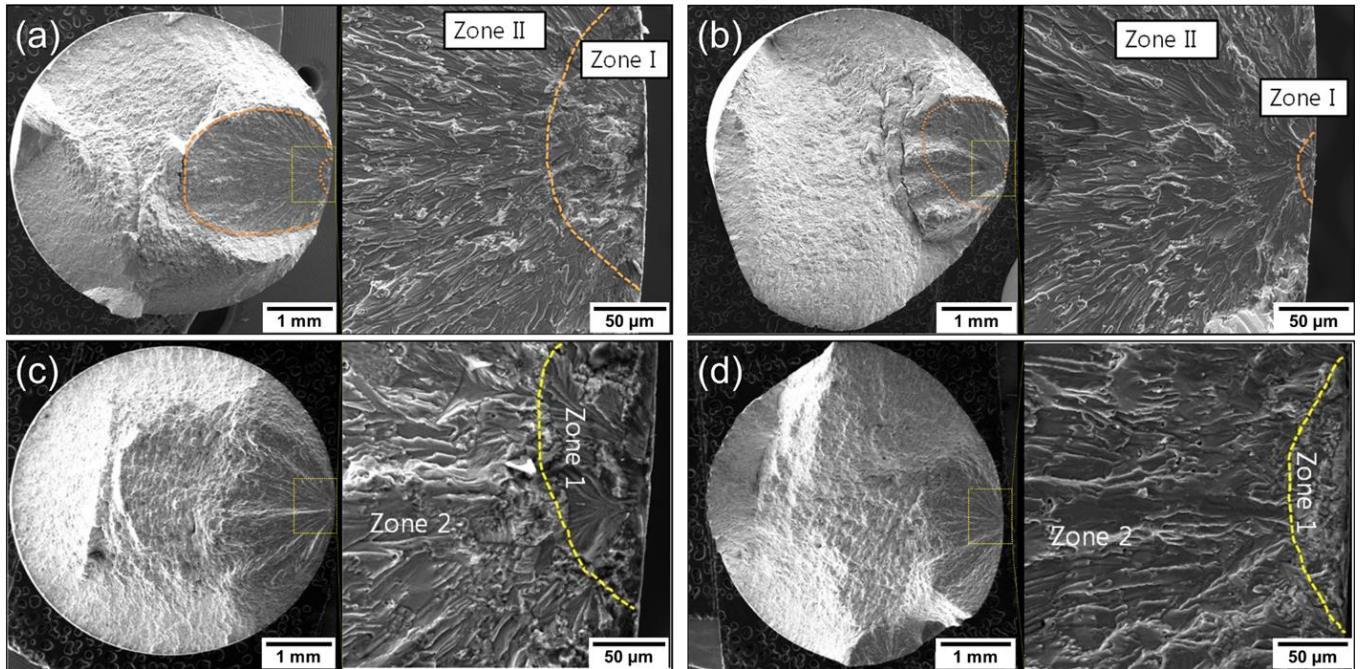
Fatigue fracture surface images and high-magnification images of fatigue crack starting points; (a) 420MPa, (b) 490MPa of modified 7075-T6 alloy and (c) 420MPa, (d) 490MPa of modified 7075-T73 alloy
